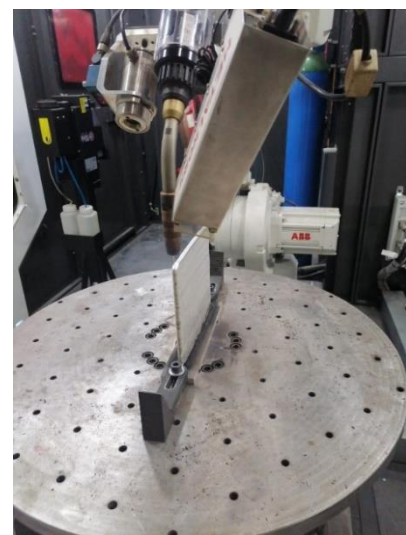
Production of A5356 first wall by WAAM welding machine
